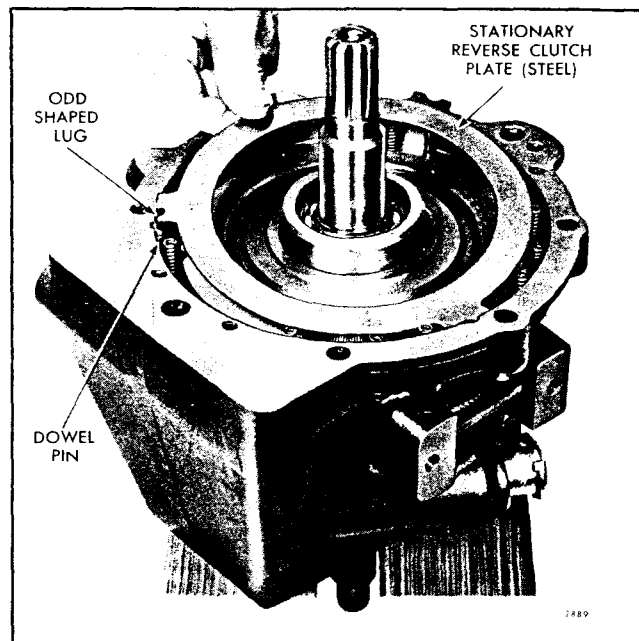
Installing Stationary Reverse Clutch Plate (Steel) in Gear Housing
